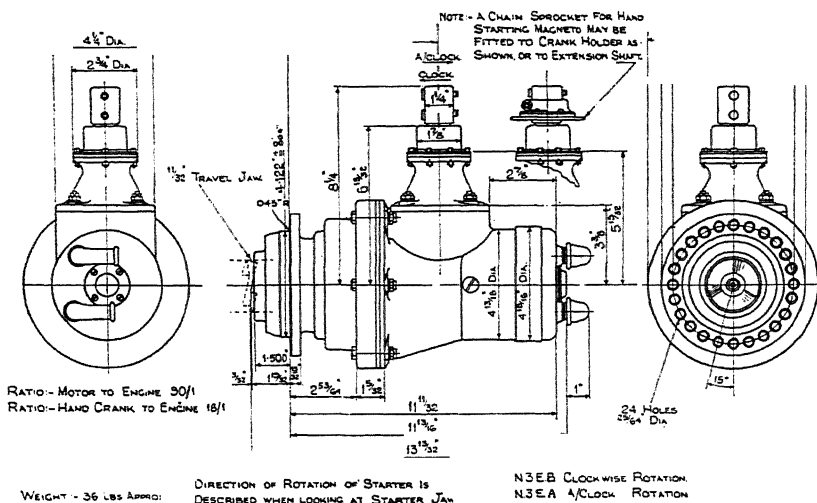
INSTALLATION DIAGRAM FOR ROTAX ECLIPSE E160C STARTER
